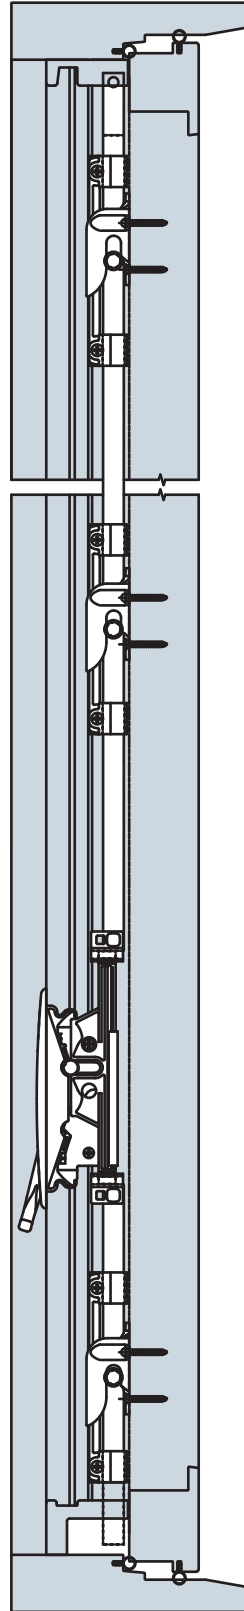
TIE BARS ABOVE AND BELOW LOCK DRIVE
